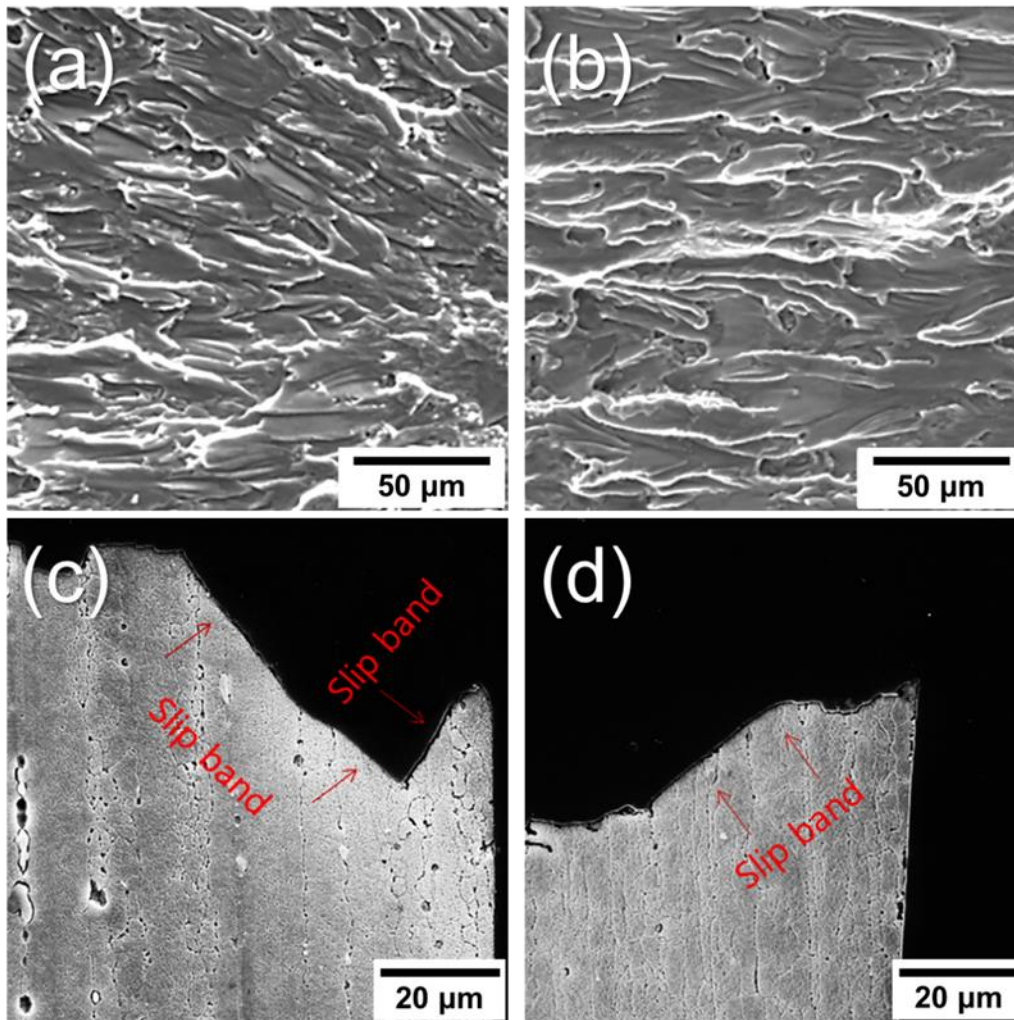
Fatigue fracture surfaces and high magnification images of fatigue crack propagation region and cross section images of fatigue fracture specimens; (a), (c) modified AA7075-T6 and (b), (d) modified AA7075 T73 alloys
